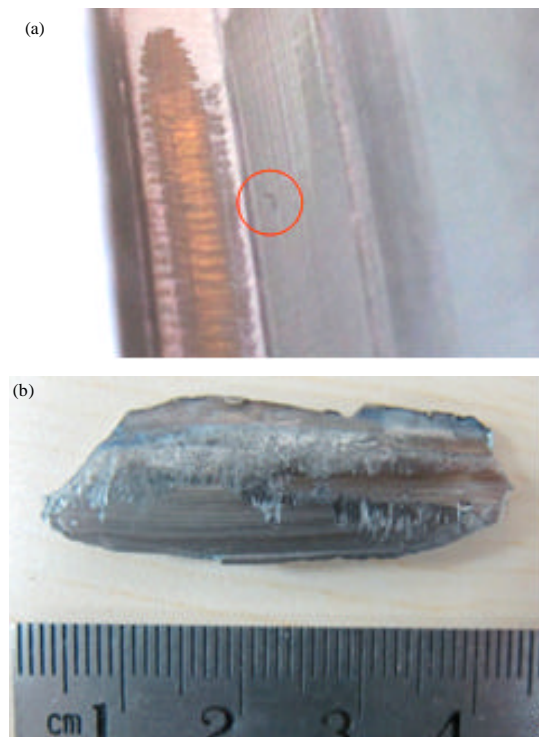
(a-b): Engineering Sample and defect morphology, (a) Defect morphology in weld metal cutting before and (b) View of the cutting engineering sample
